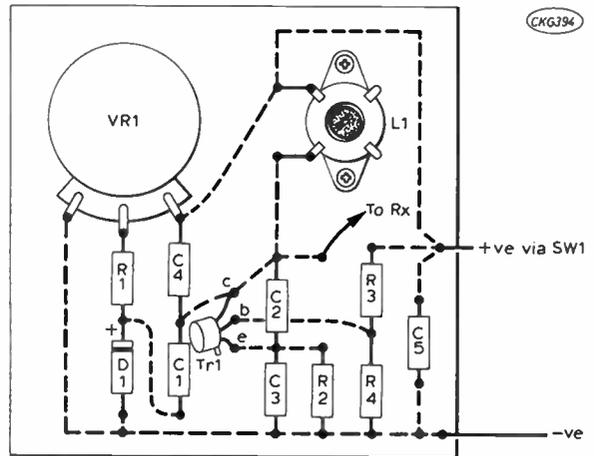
A suggested component layout on drilled s.r.b.p. board.
